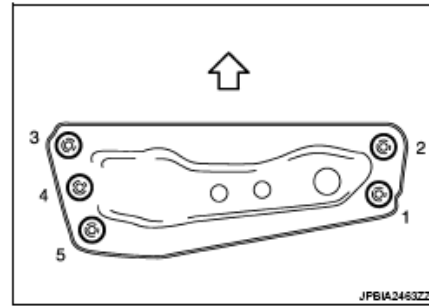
Identifying Rear Engine Mounting Member Bolts Tightening Sequence
